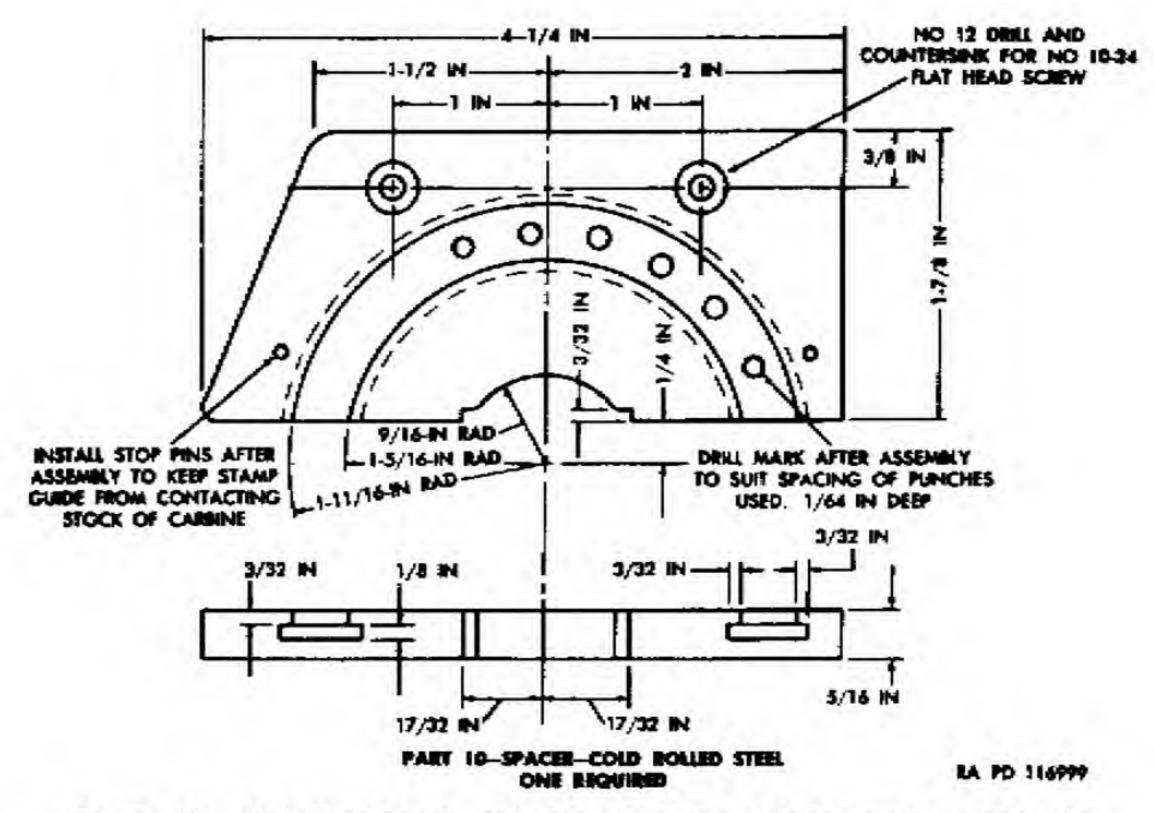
Detail of bench-mounted stamping fixture—part number 10.
